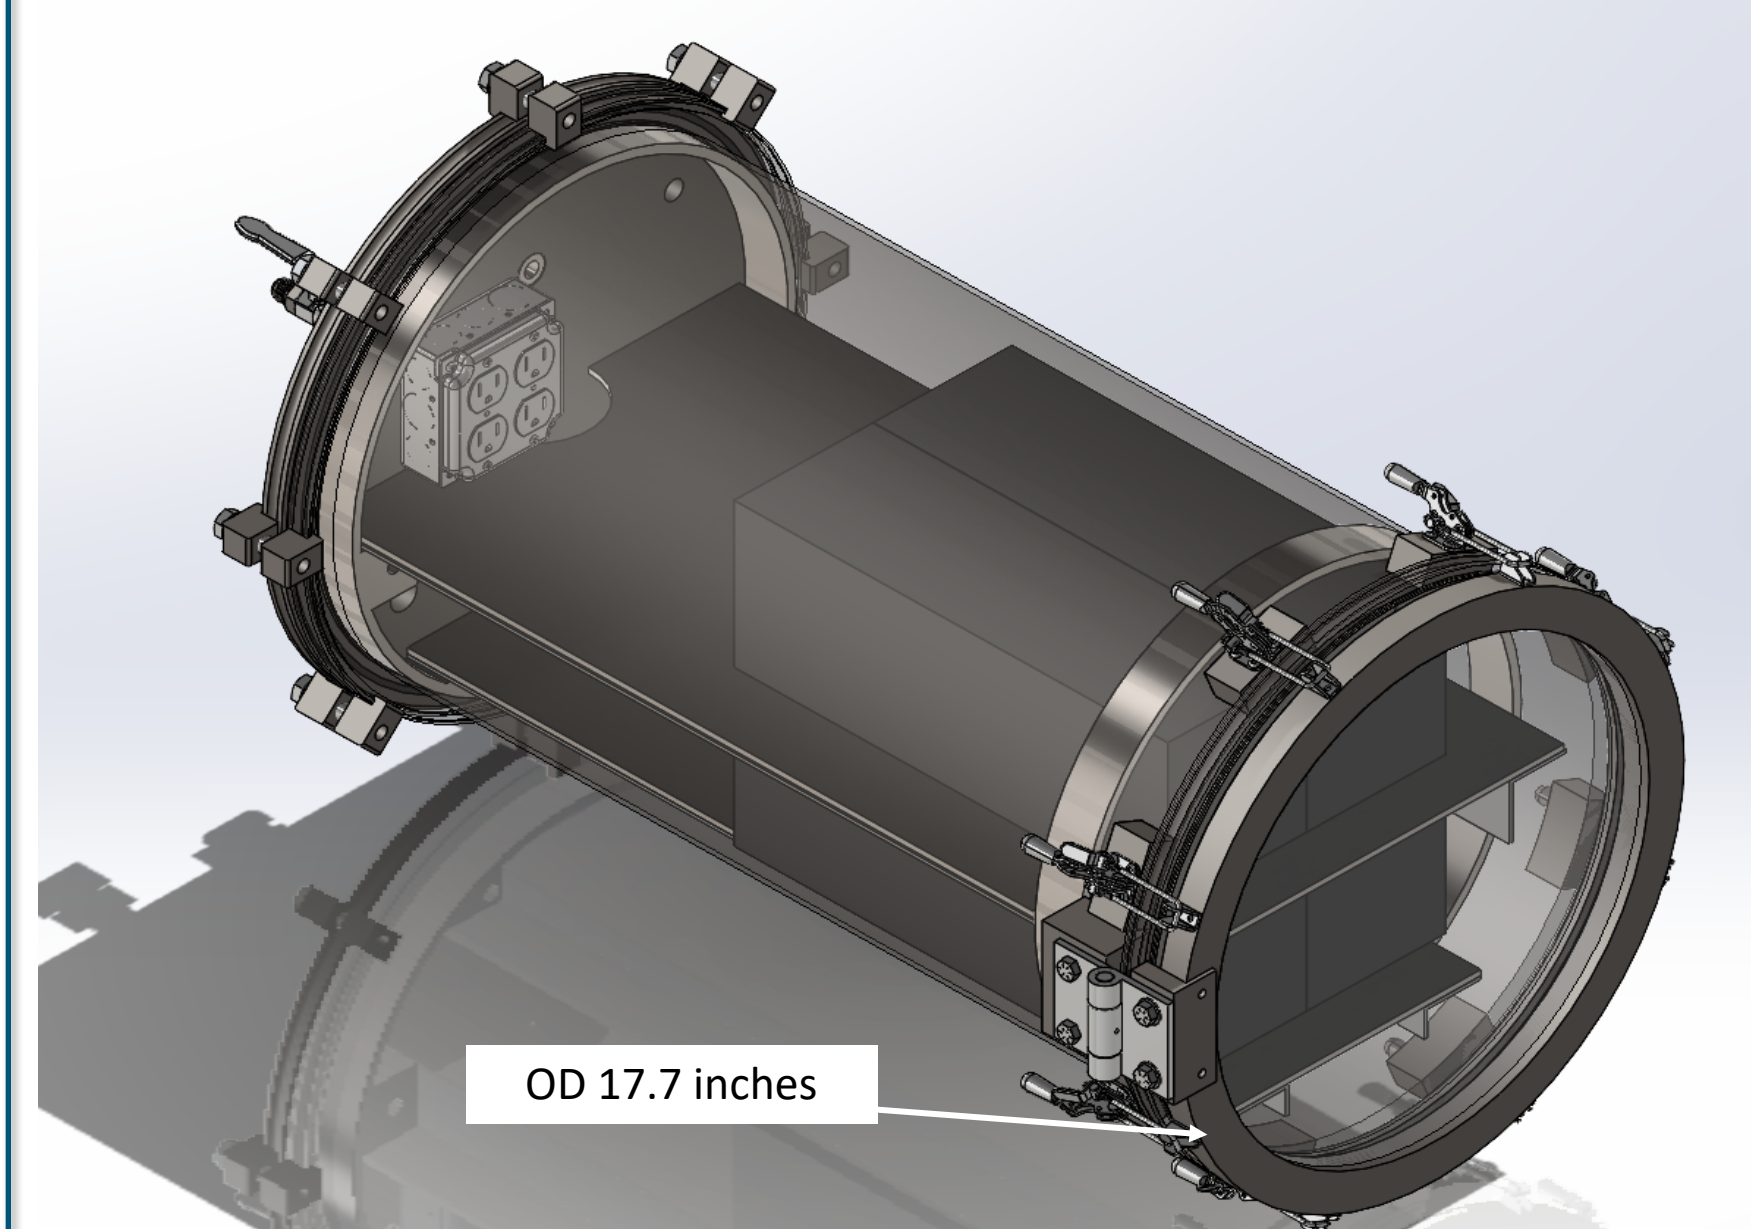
Working redesign of pressure chamber with added latch clamps, hinged door, AC power access, and removable shelves.
